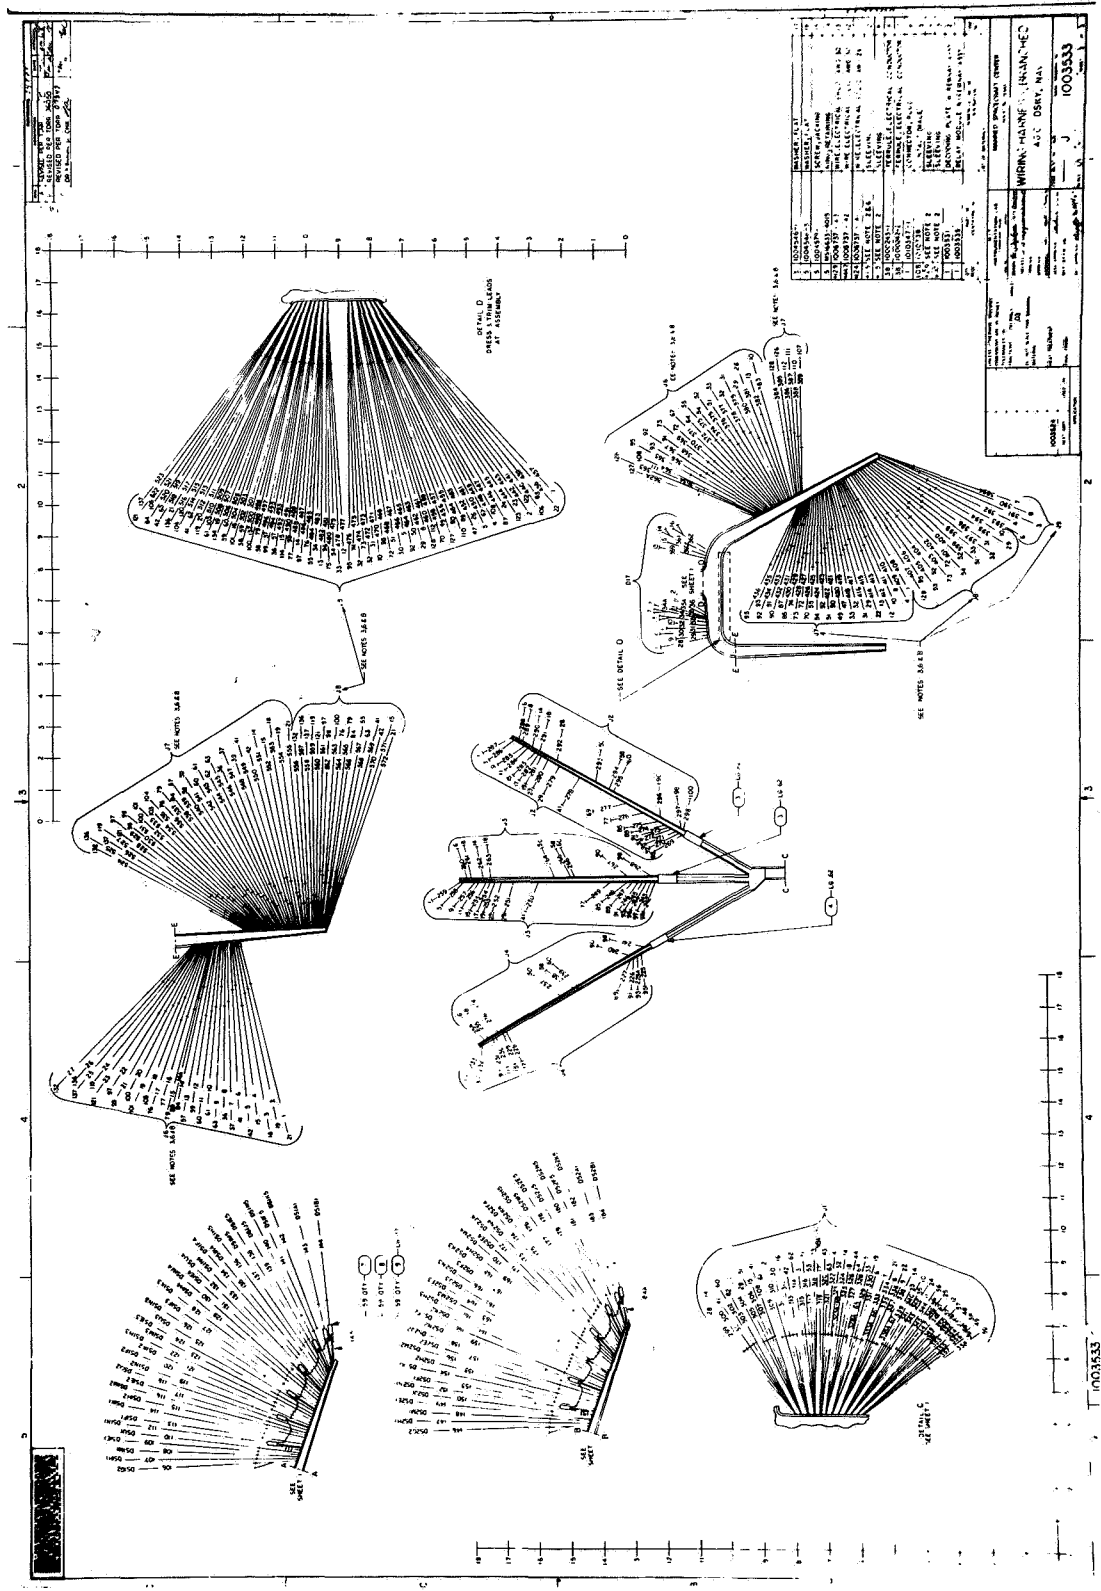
Sample Assembly Drawing, Wiring Harness, Branched (Sheet 3 of 3).
